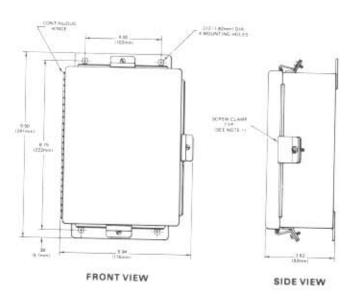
Standard Unit with Panel Mount Enclosure (PM) Option, Outline and Dimensions
